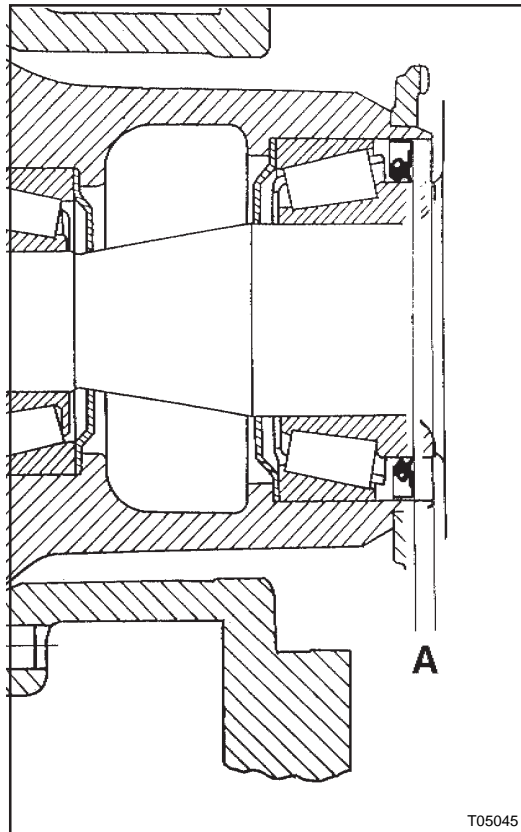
Double lip seal set back. Dimension "A" equals 3/16 inch
